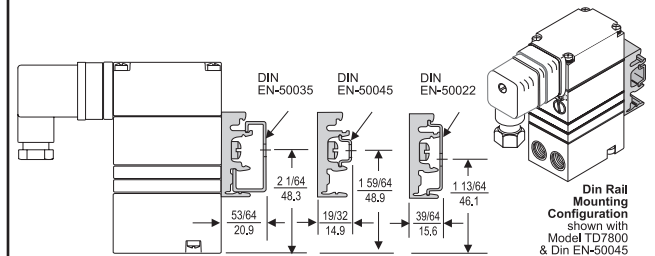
Din Rail Mounting Kit 16893 (included with unit)
